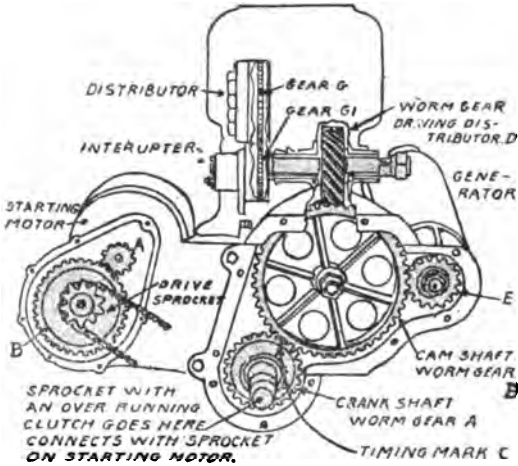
Driving the generator from cam shaft, also distributor and "interrupter," but independent from each other. The starting motor drives "through the crank shaft" by a silent chain and over running clutch. This system is a "three unit" system formerly employed by "Studebaker Six." See page 244, fig. 4, for description of this "interrupter" timer.
